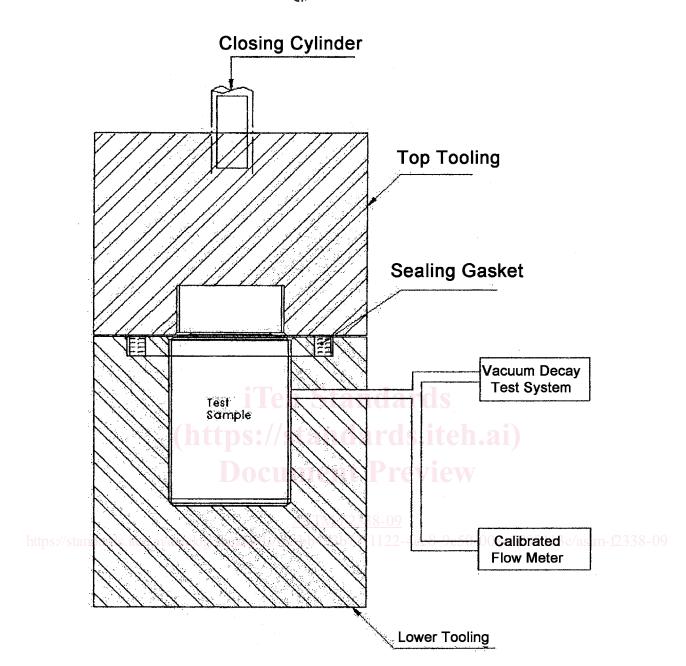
Schematic of Fixture and Rigid, Nonporous Test Package
